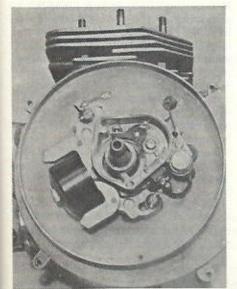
Timing ignition on models 175, 270, 271, 370, 371 and 1670. Punch mark on stator near upper mounting screw should align with mark on stator backing plate.
